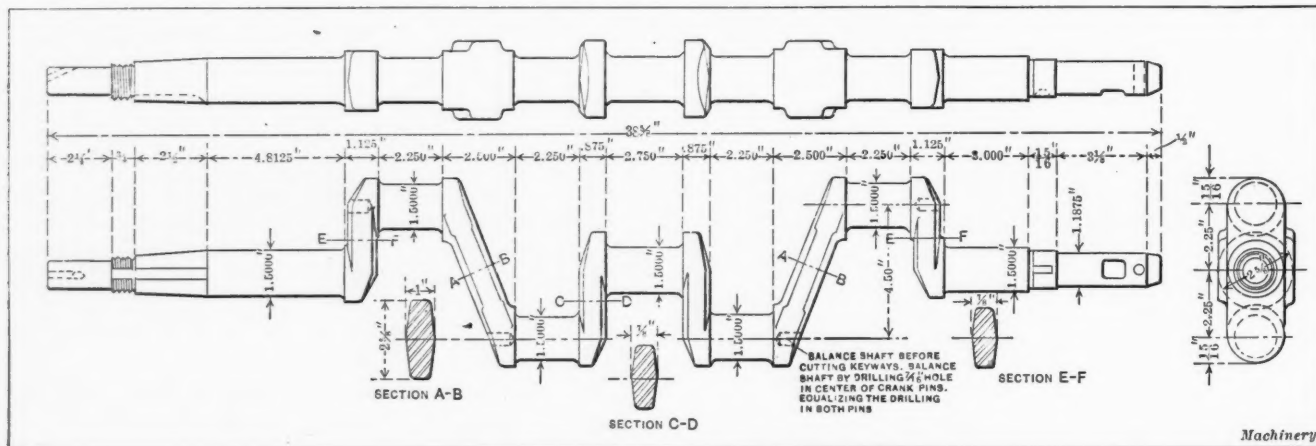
Important Dimensions of the Crankshaft shown in Fig. 1
